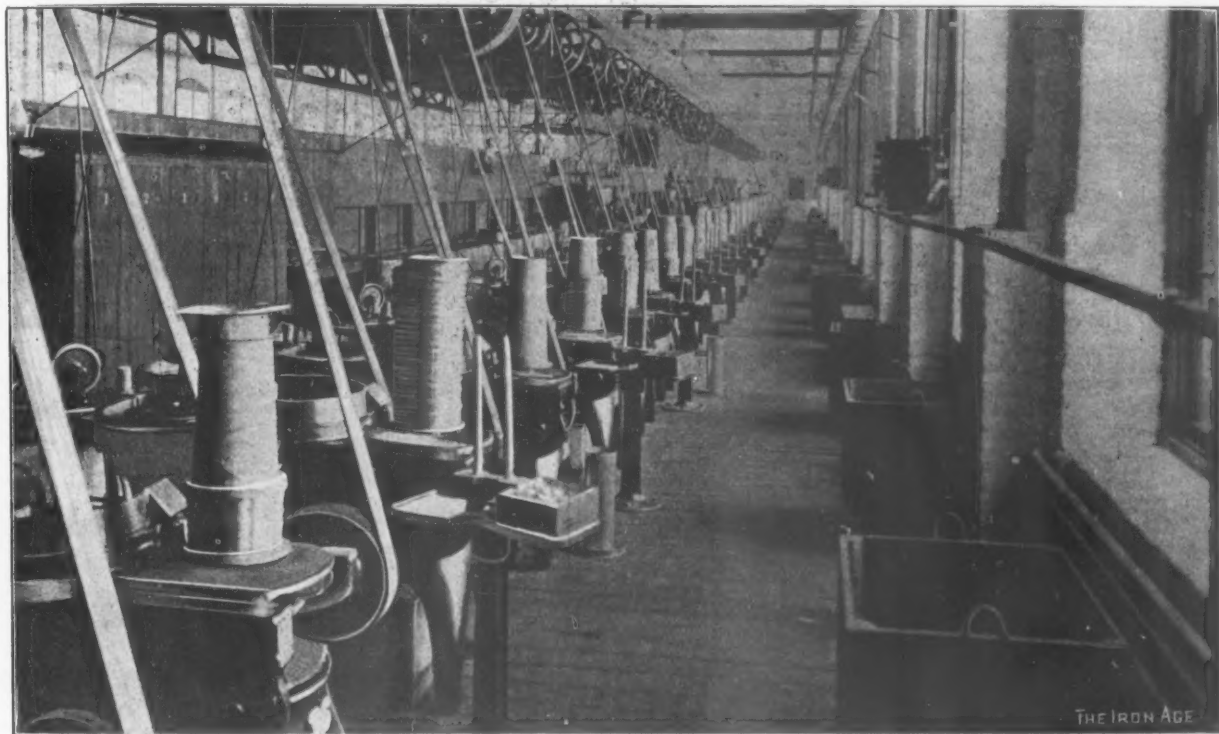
Wire Drawing Room, Showing 36 No. 4 Multiple Die Machines in Operation
